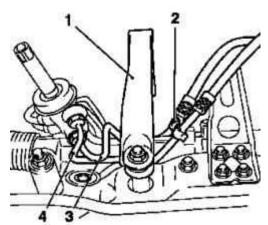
Removing the pipe from the steering meanizma: 1 - bracket damping engine block, 2 - holder, 3 - supply pipeline, 4 - return pipeline
